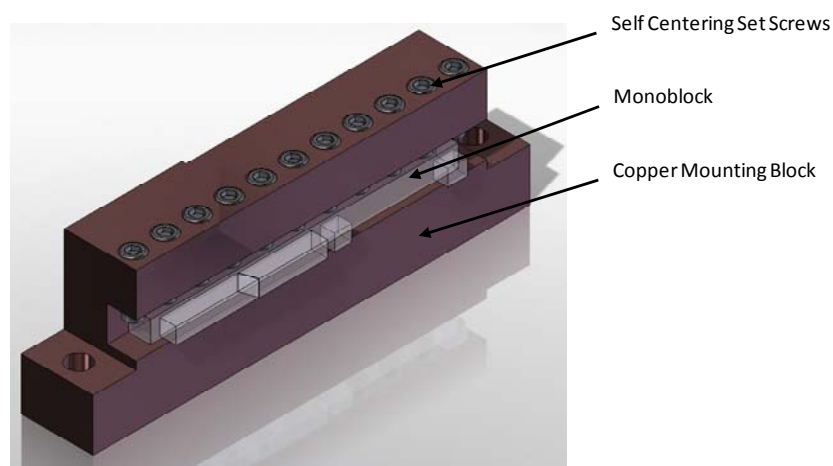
A SolidWorks drawing of the current Monoblock mounting scheme.
